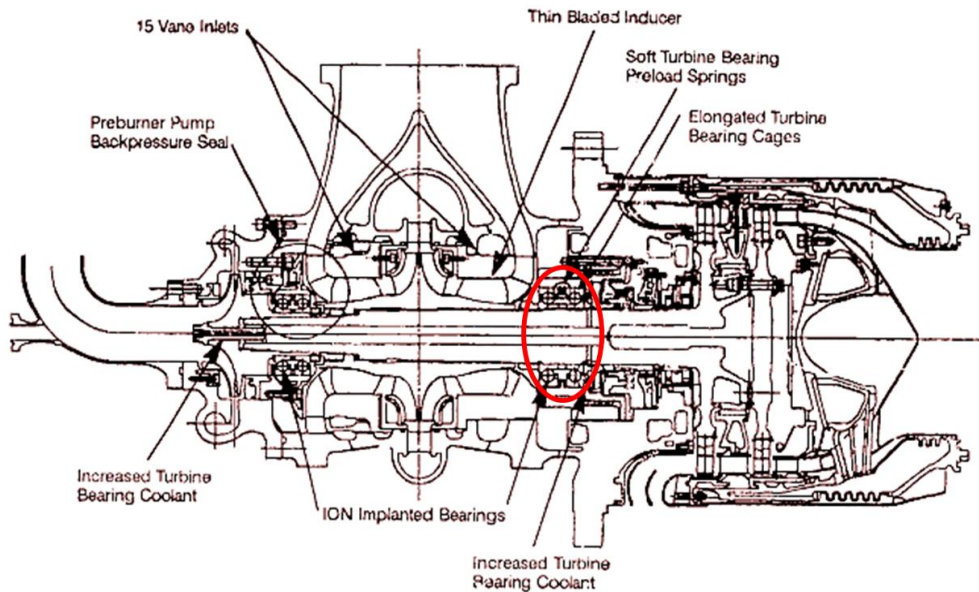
SSME LOX Pump Cross-Section Highlighting Bearing Location
